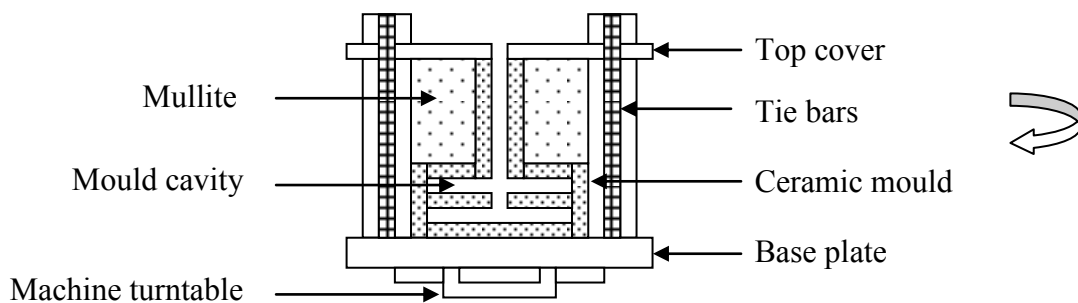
2. Mould assembly for vertical centrifugal casting process.
